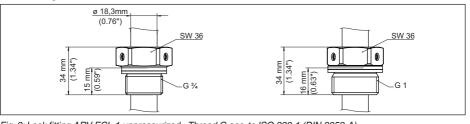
Lock fitting ARV-ECL.1 unpressurized - Thread G acc. to ISO 228-1 (DIN 3852-A)
